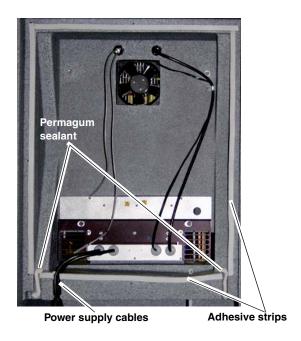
Rear view with module removed (Adhesive strips, Permagum sealant, power cables)
